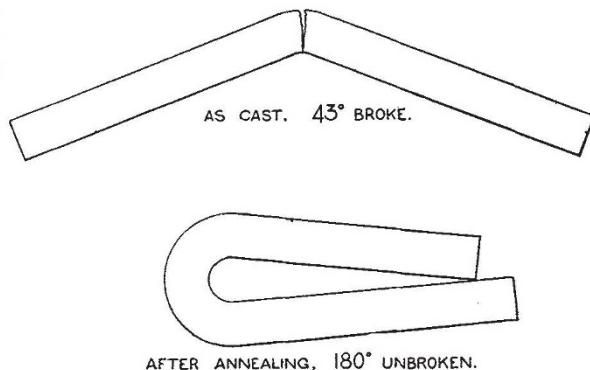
Dimensions of test-pieces:— $10'' \times \frac{3}{4}''$  diam.; bending radius,  $\frac{3}{8}''$ .
